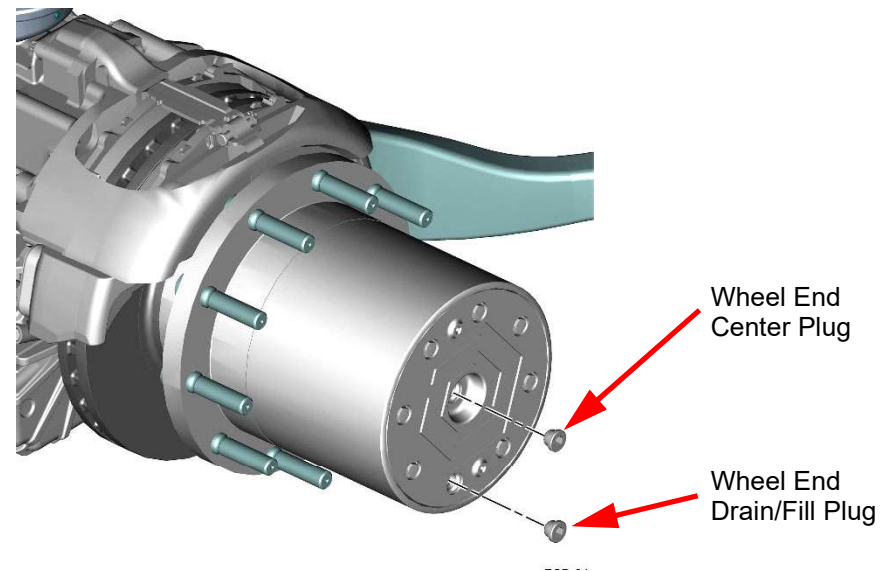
Removing Wheel End Drain/Fill Plug and Center Plug
